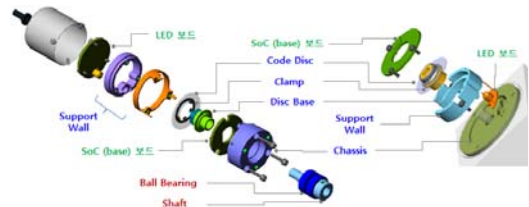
Modular and Component Types of Rotary Sensor Mechanism
